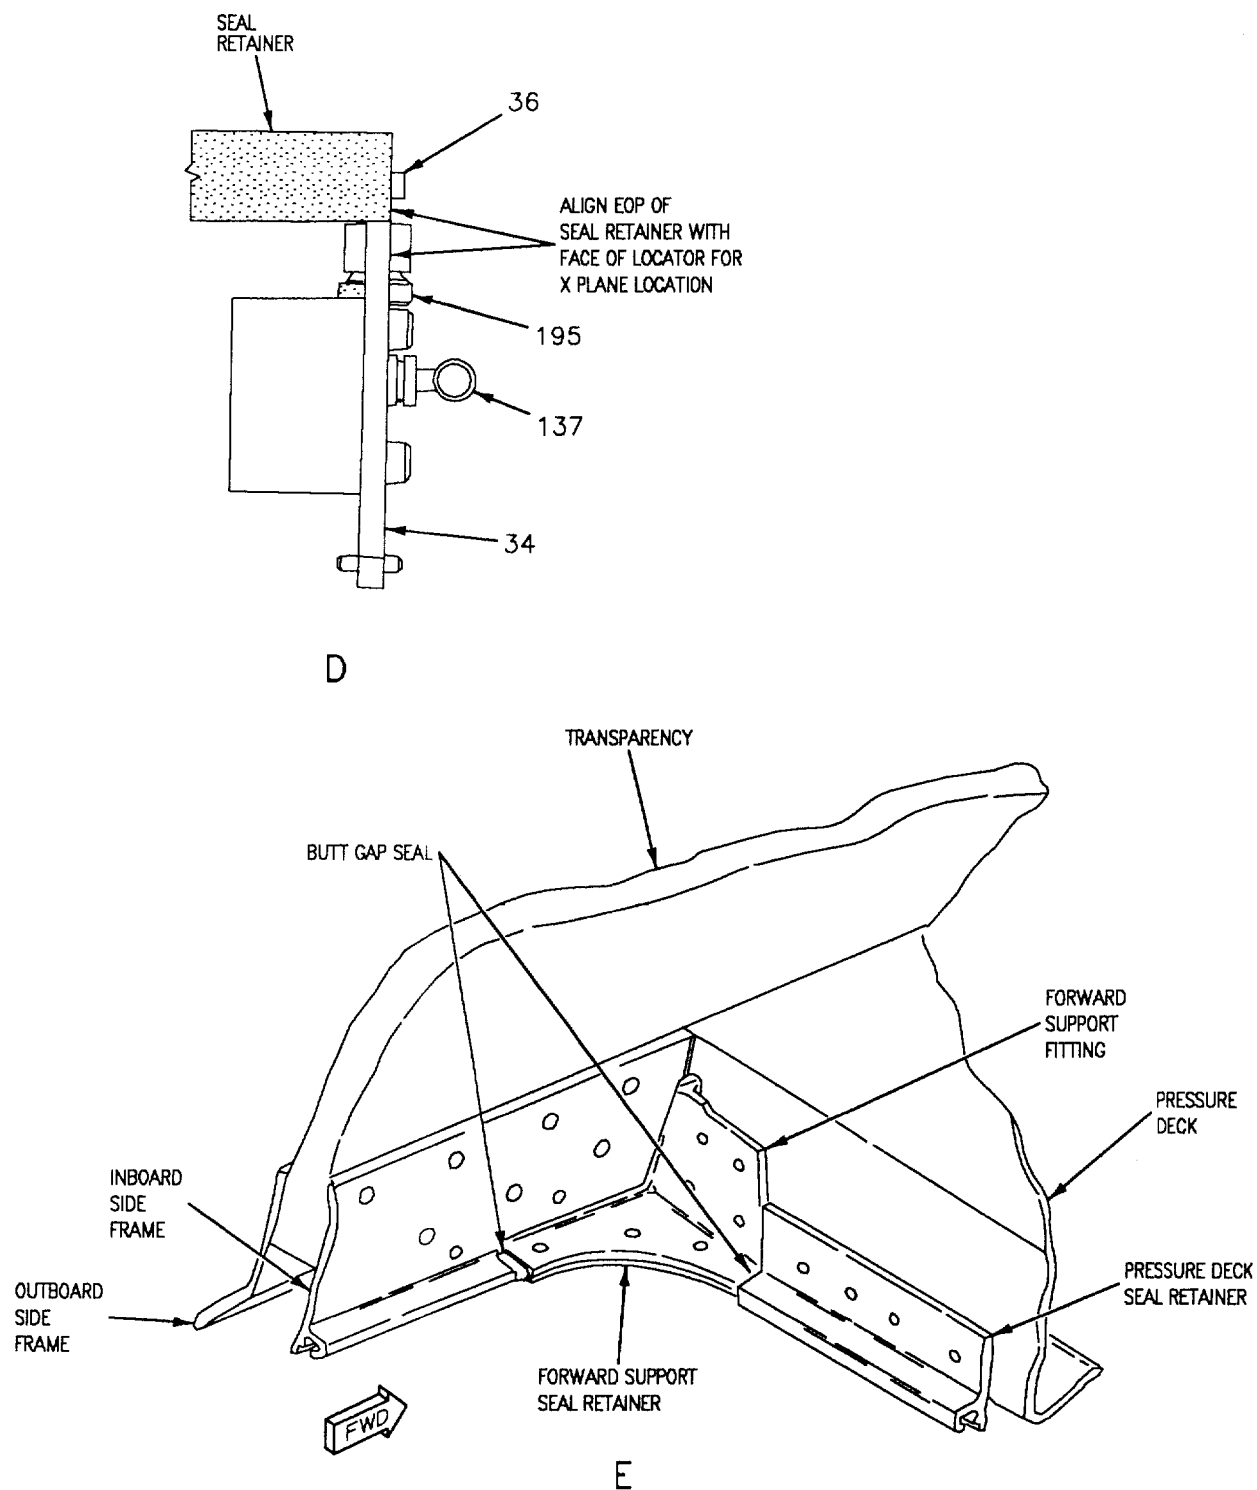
Inspection or Replacement - Seal Retainer (Sheet 3)
